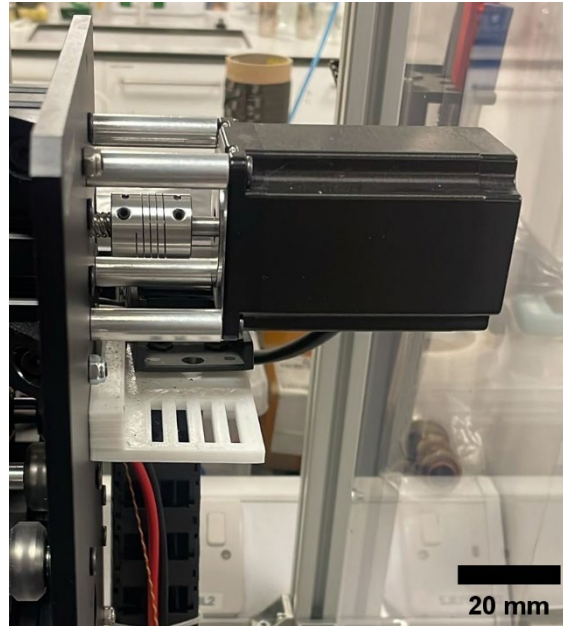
MT-2303HS280AW motor (MOTTECH MOTOR CO., LTD., China)
